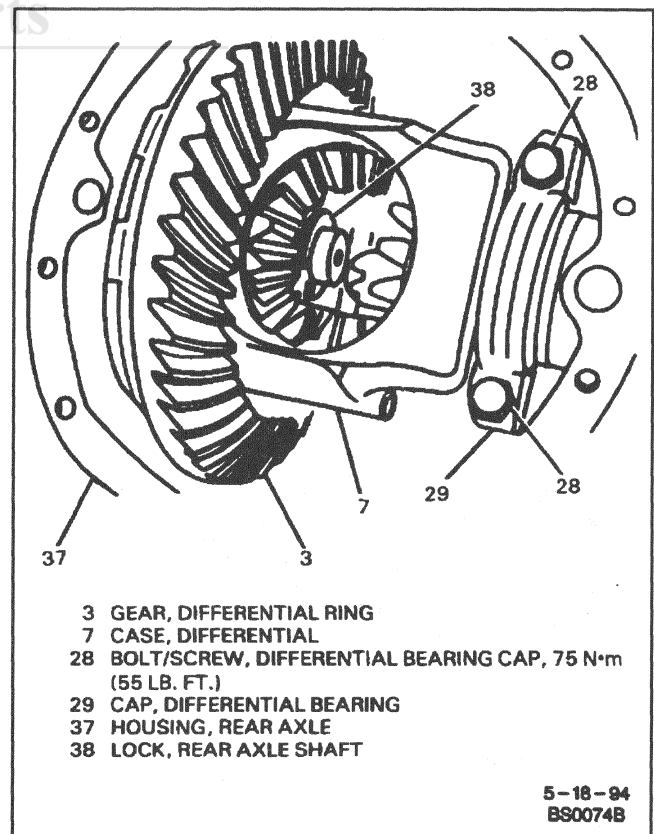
Internal View of Rear Axle Housing (Non-Limited Slip)
